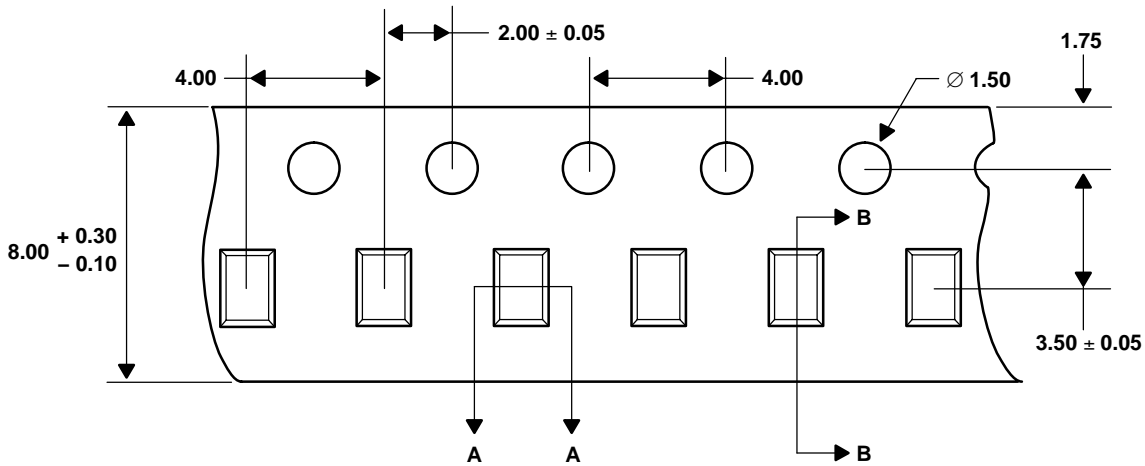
Package T — Six-Lead TMB Plastic Surface Mount Packaging Configuration
